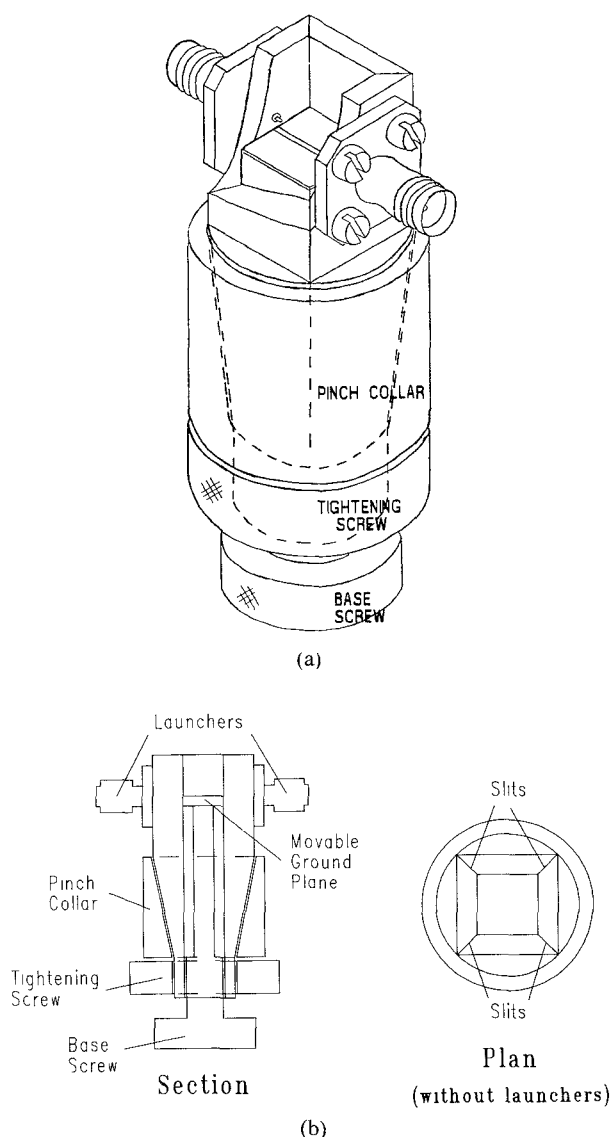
Measurement fixture. (a) Cutaway view. (b) Section and plan views.
